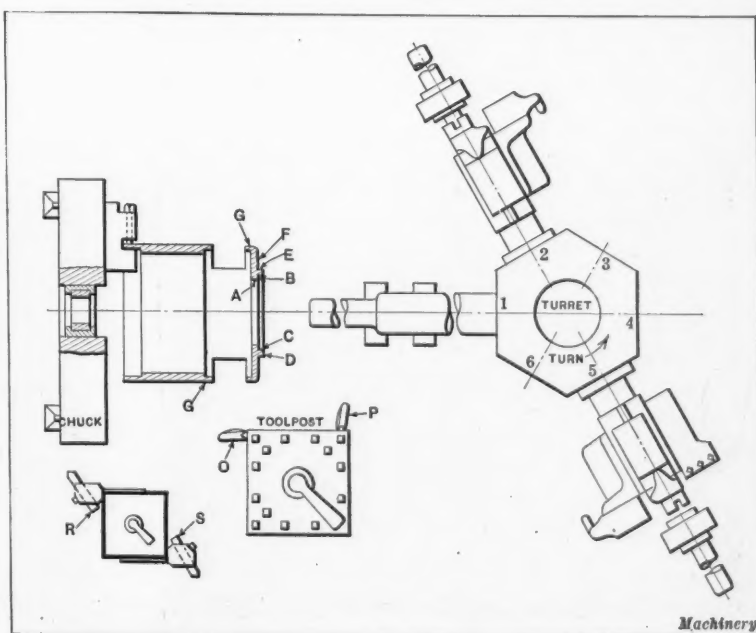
Tooling Equipment for First Operation on Motor Frame
